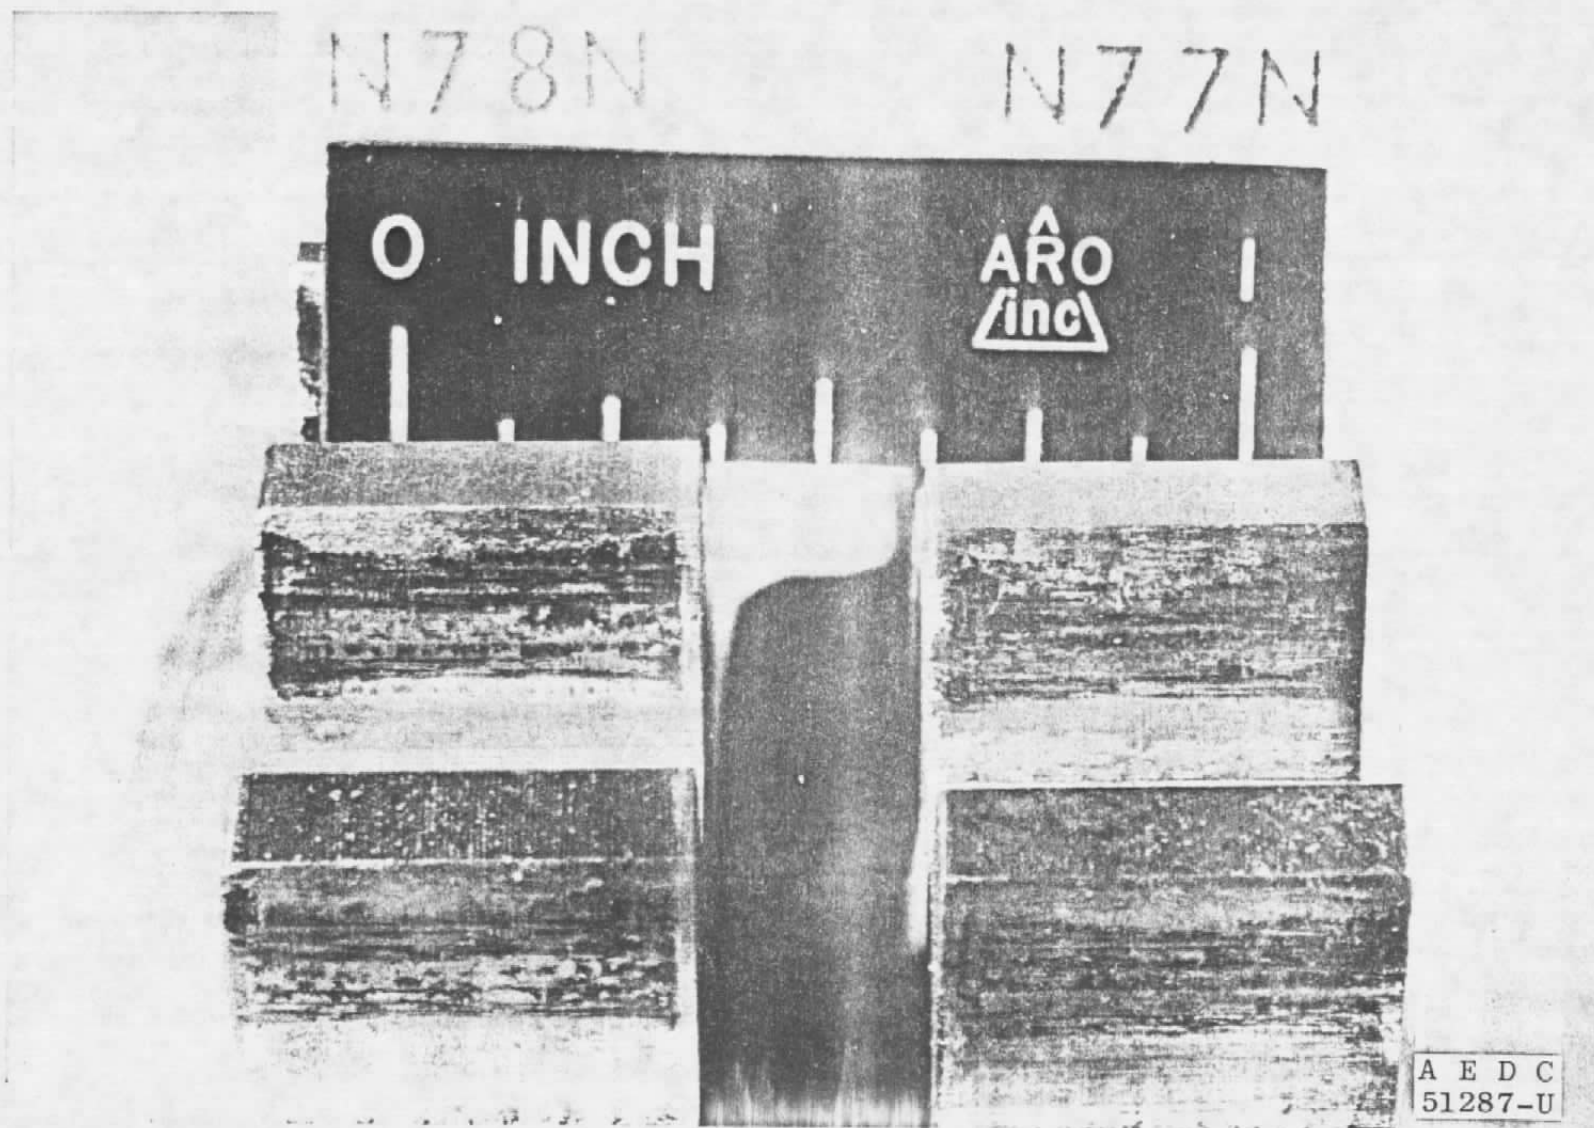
7-D.P. Steel Gears after 100 hr in Test 3
